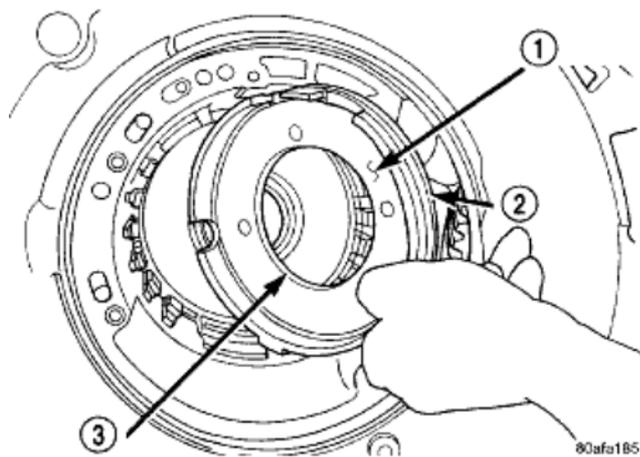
Identifying Low/Reverse Clutch Piston & Bonded Seals
